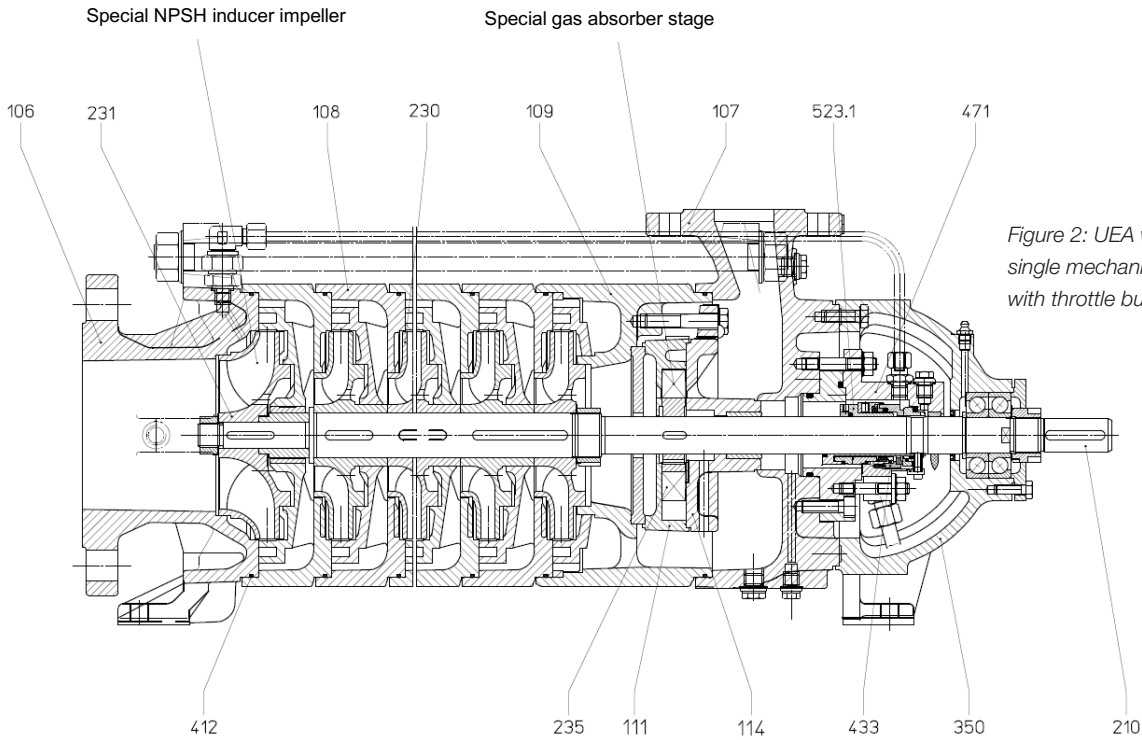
UEA with balanced single mechanical seal DNE with throttle bush
